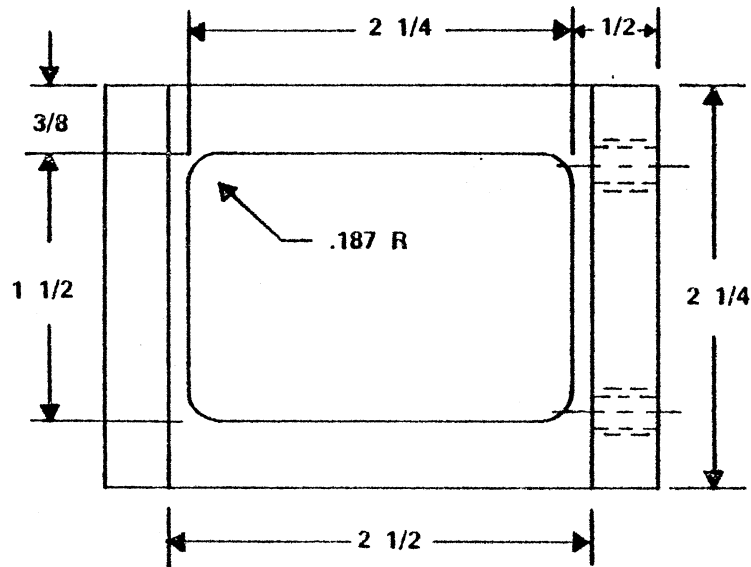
Detailed Mechanical Drawing of Photoacoustic Cell
